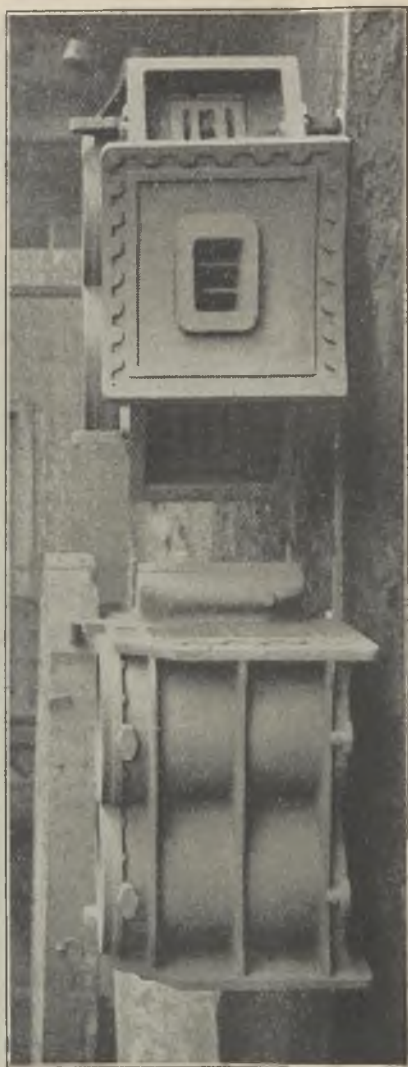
Loco. CYLINDER CASTINGS (24 TONS), MADE BY THE METHOD SHOWN IN FIG. 7.
